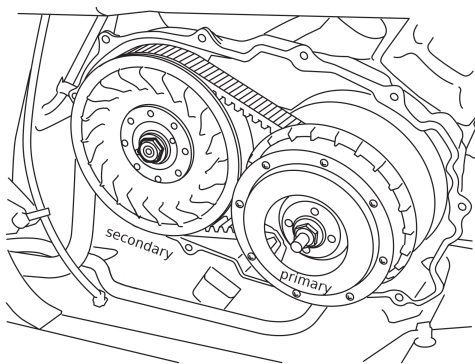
CVT assembly shown mounted on the vehicle [10, p. 5-58]
